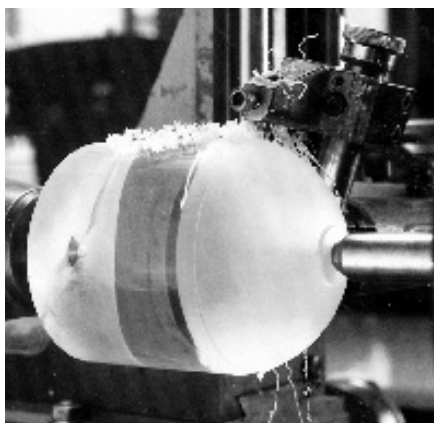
Ball shape made from PLEXIGLAS® GS round rod using a ball turning fixture
